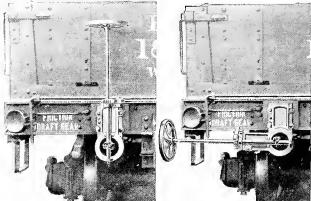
Feasible Drop Brake Staff. U. S. Metal & Manufacturing Company.
